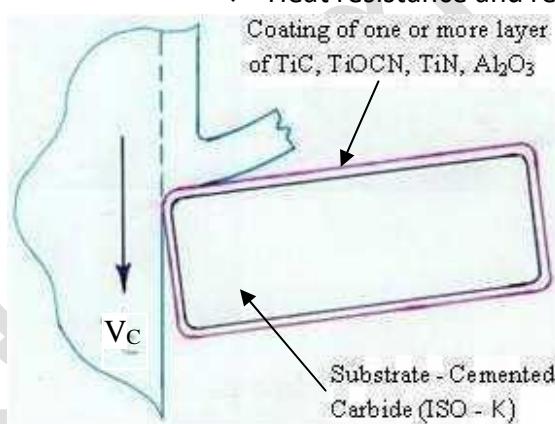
Machining by coated carbide insert. Fig. 1.18 Role of coating even after its wear and rupture
